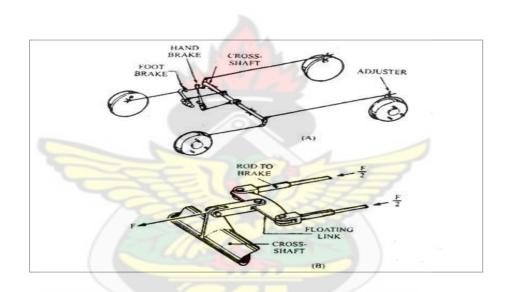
Mechanical brake layout. (A) Brake layout. (B) Brake compensator to balance two brakes
